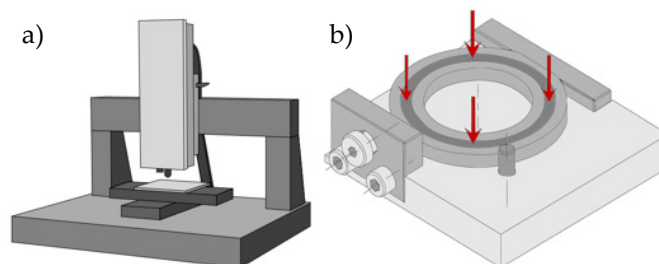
Surface measuring equipment: (a) confocal microscope with positioning stage on which the sample is placed; (b) sample holder with visualisation of possible measurement points [11].
